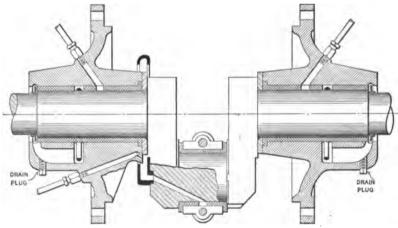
Mietz and Weiss Crank-shaft Bearings.
